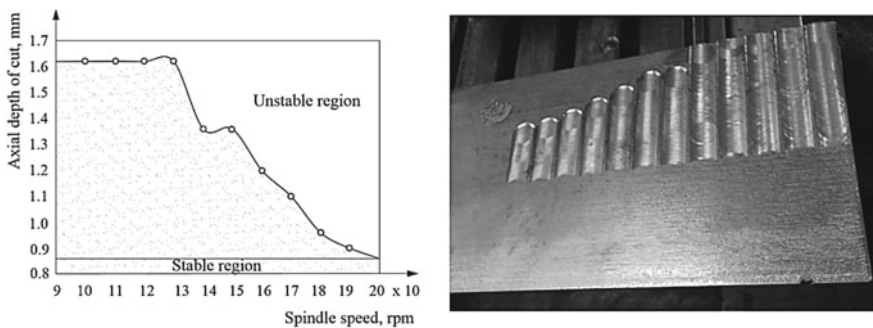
The SLD on the graph (left) and its mirrored image machined into the workpiece (right)
